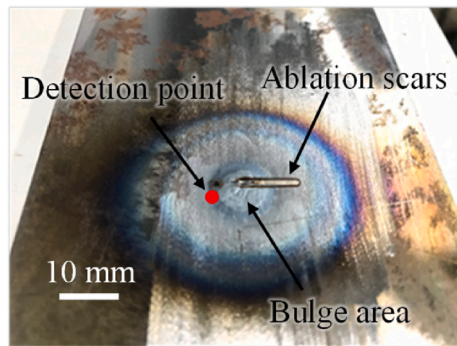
The appearance of the bottom surface after the TIG arc spot welding under the thick plate condition.
